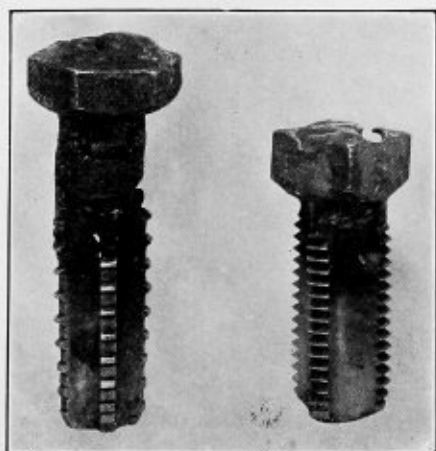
Broken Taps, Removed by Arc Welding Equipment
